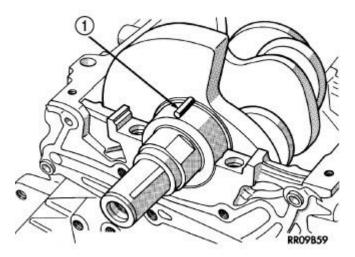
Placing Plastigage Across Bearing Shell Courtesy of CHRYSLER LLC
